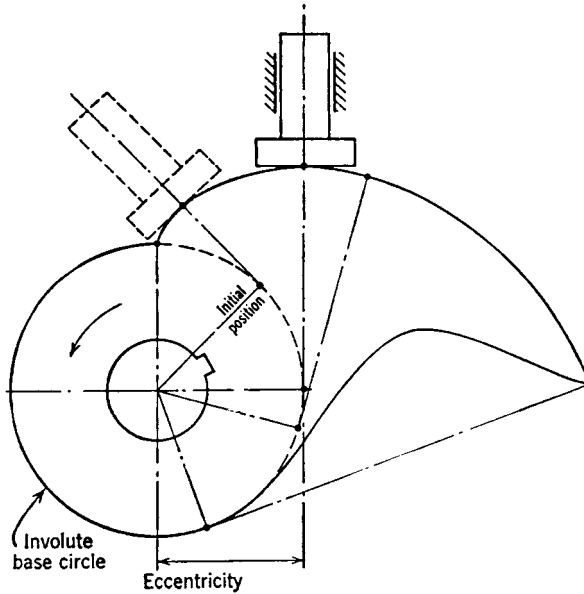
Involute cam (single lobe for stamp mill).
